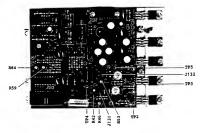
Locations of adjustments on the YIG Oscillator Driver board (BLC-010224)
